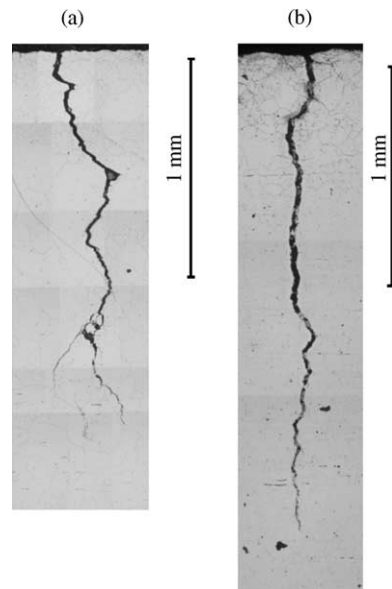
Cross-sections of two artificially produced thermal fatigue cracks in AISI 304 type austenitic stainless steel with different fracture surface roughness resulting from different production parameters. Cracks after (a) 30,000 thermal fatigue cycles and (b) 2770 thermal fatigue cycles.
